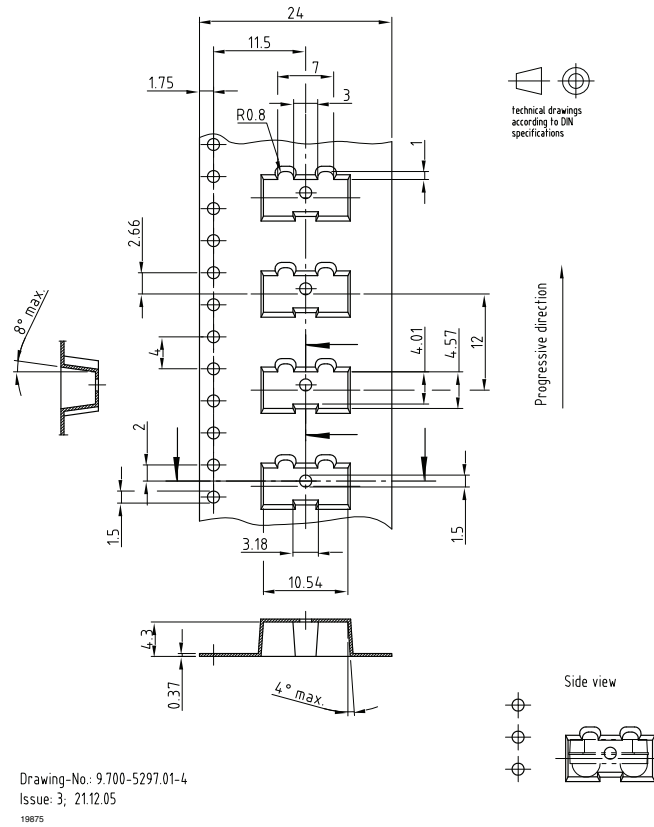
Tape for 4.0 mm Package Side View Oriented (TFDUx101TRx)
